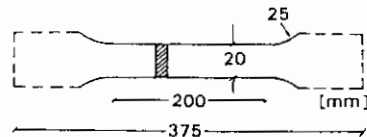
Typical dimensions of a rectangular cross-section tensile test specimen according to BS 18: Part 2: 1971.
